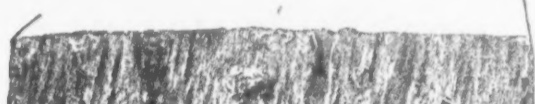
Faces of Fracture of Test-Piece D, Fig. 11.
